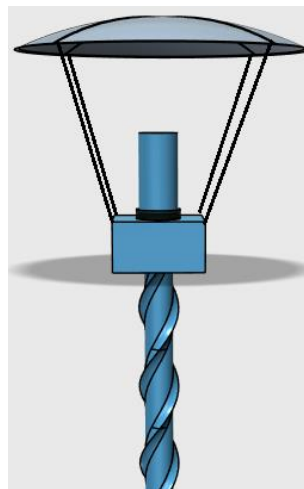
Initial design concept with corkscrew inlet pipe and parabolic shield
